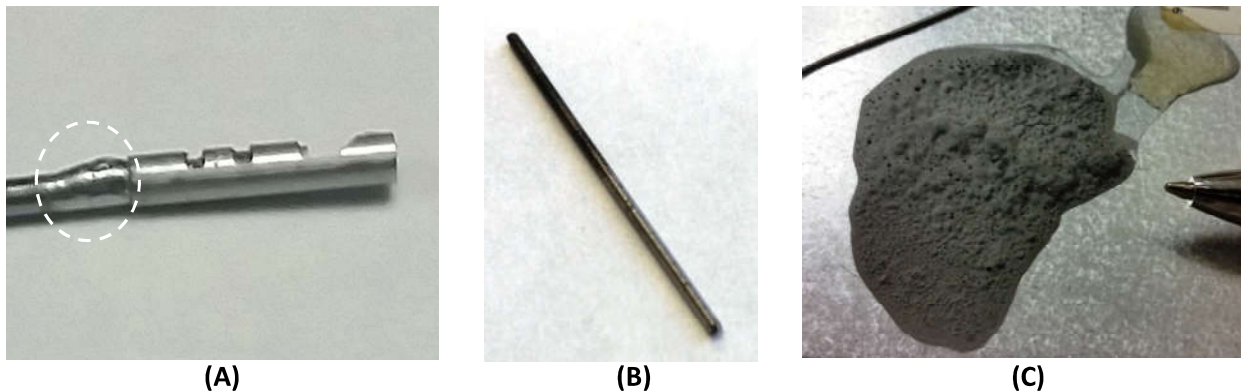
A) Residual solder on the TC, B) oxide formation during soldering on TC and C) flux in solder paste and disappearance of a large portion of paste after heating up.
